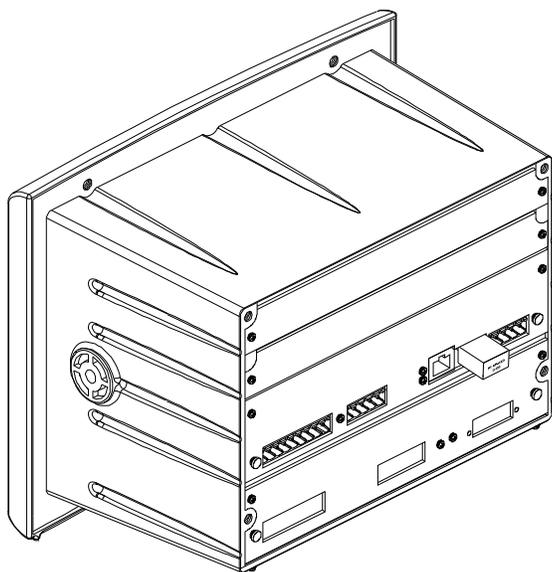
MAIN CONTROLLER BOARD INSTALLED WITH REAR PLATE
